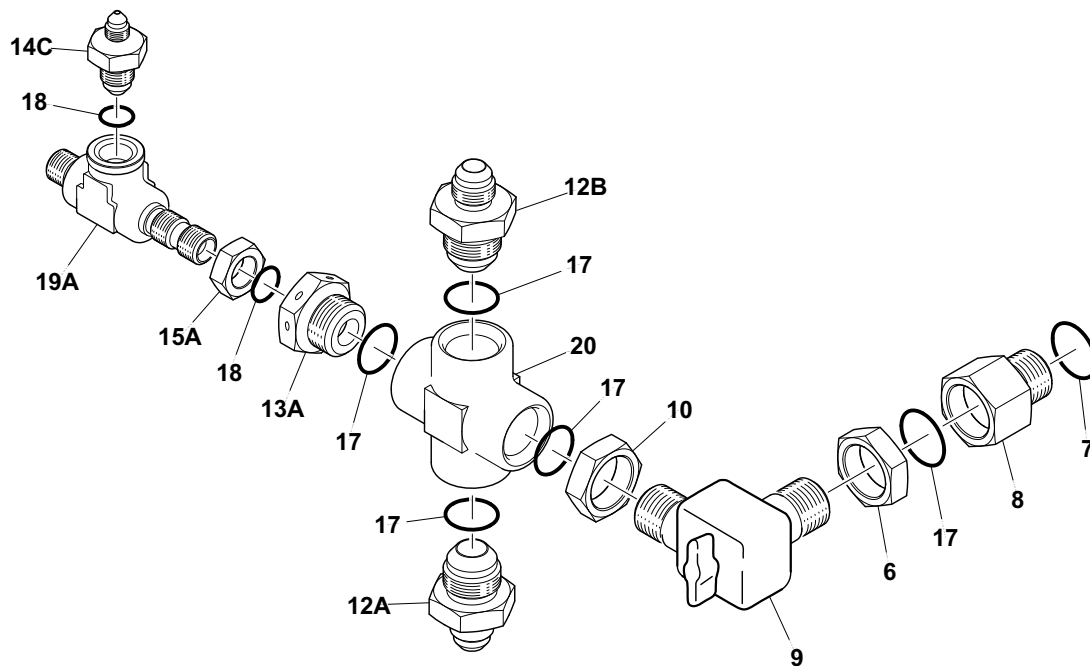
Engine Assembly (Sheet 1 of 3)
